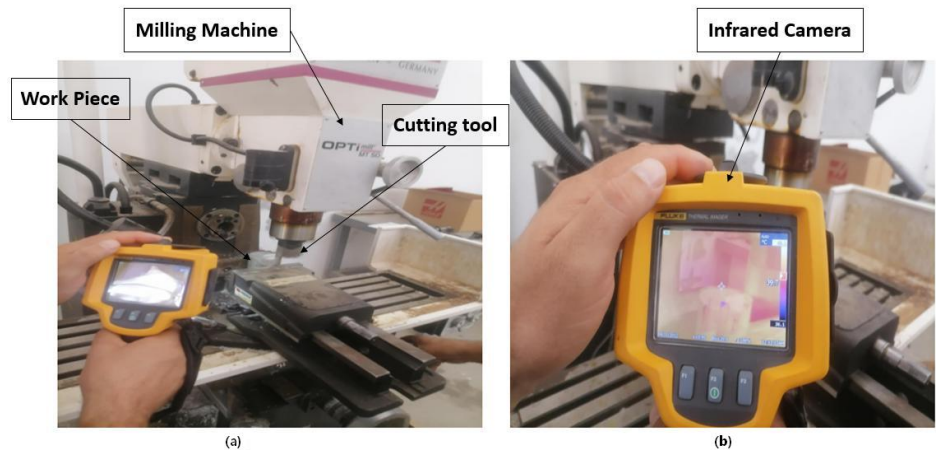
Experimental setup: (a) OPTImill MT50 milling machine; (b) Fluke Ti27 infrared camera.
